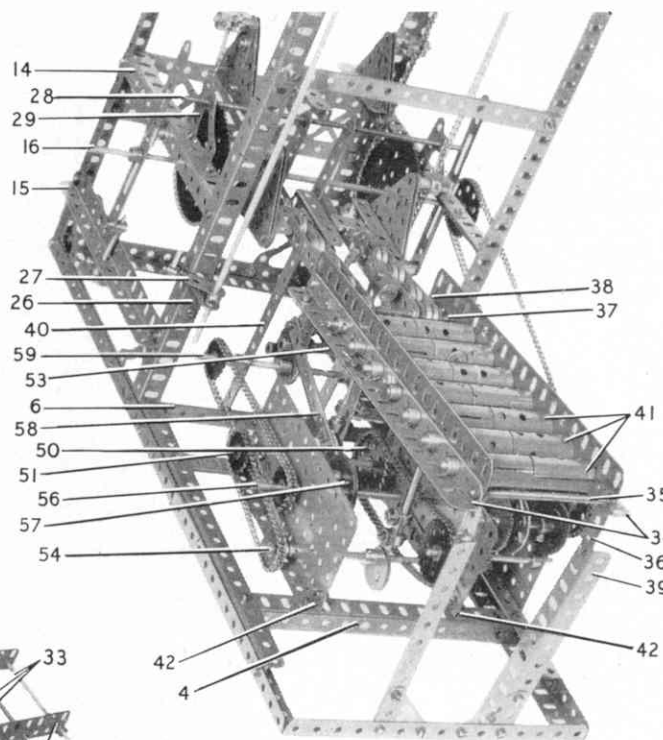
A close-up view of the feed-in and its drive mechanism.
